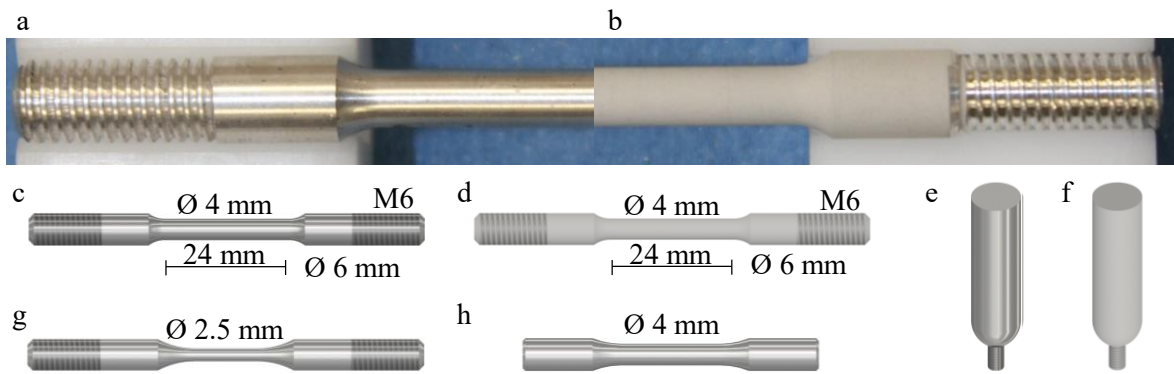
Specimens used for corrosion tests: (a) picture of an uncoated WE43 specimen, (b) picture of a PEO-coated specimen, (c) tensile test specimen, (d) coated tensile test specimen, (e) uncoated pin specimen, (f) coated pin specimen, (g) fatigue specimen, (h) fatigue specimen for strain-controlled experiments.
